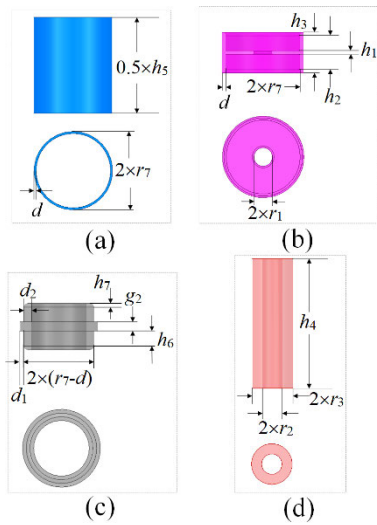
Three views and specific dimensions of the elements of the ferrite-EBG structures. (a) Aluminum tube. (b) Aluminum connector. (c) Nylon connector. (d) Bead.
